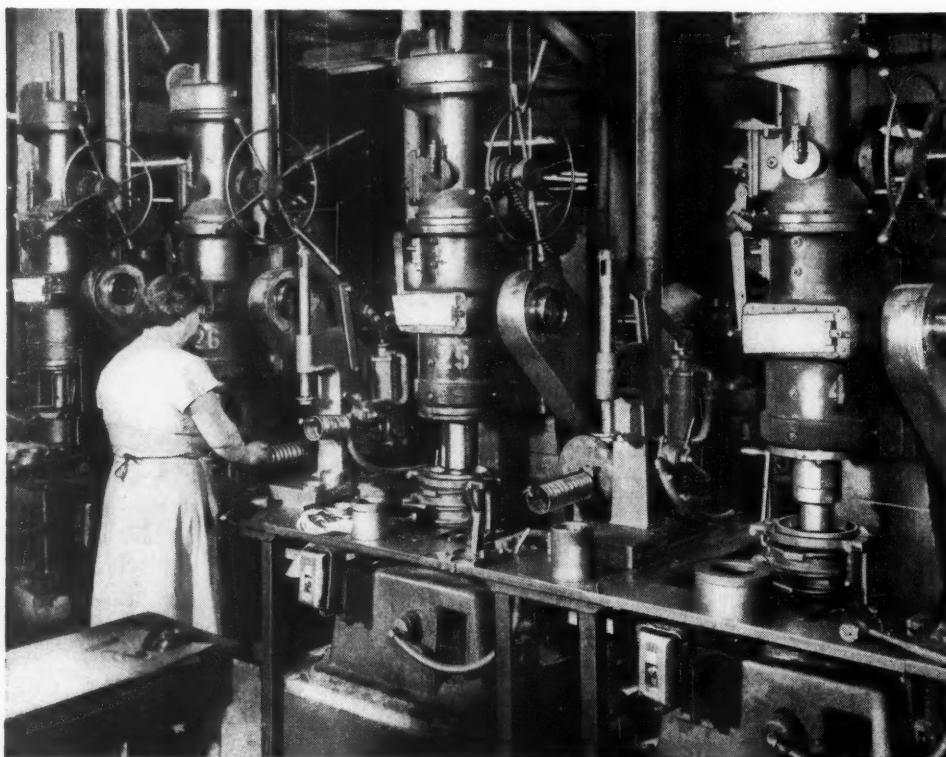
Boring mills especially designed for finish-boring oil control rings. One operator attends four machines in which the work is held by air-operated fixtures
